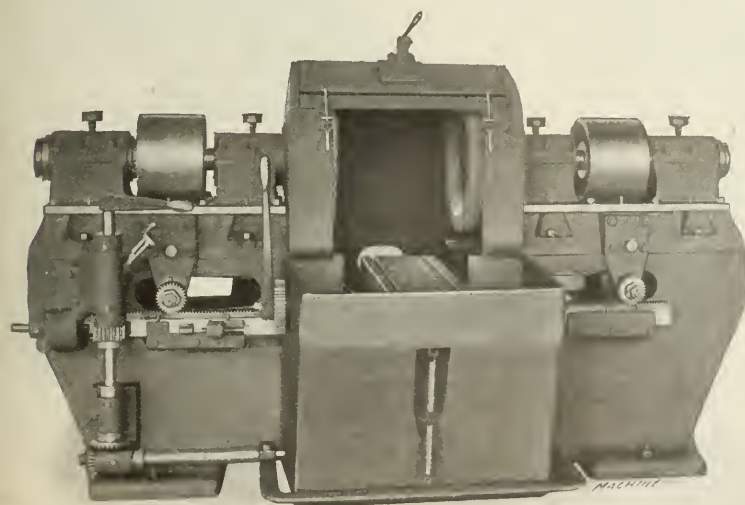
Front View of Gardner No. 15 Disk and Ring Wheel Grinder
